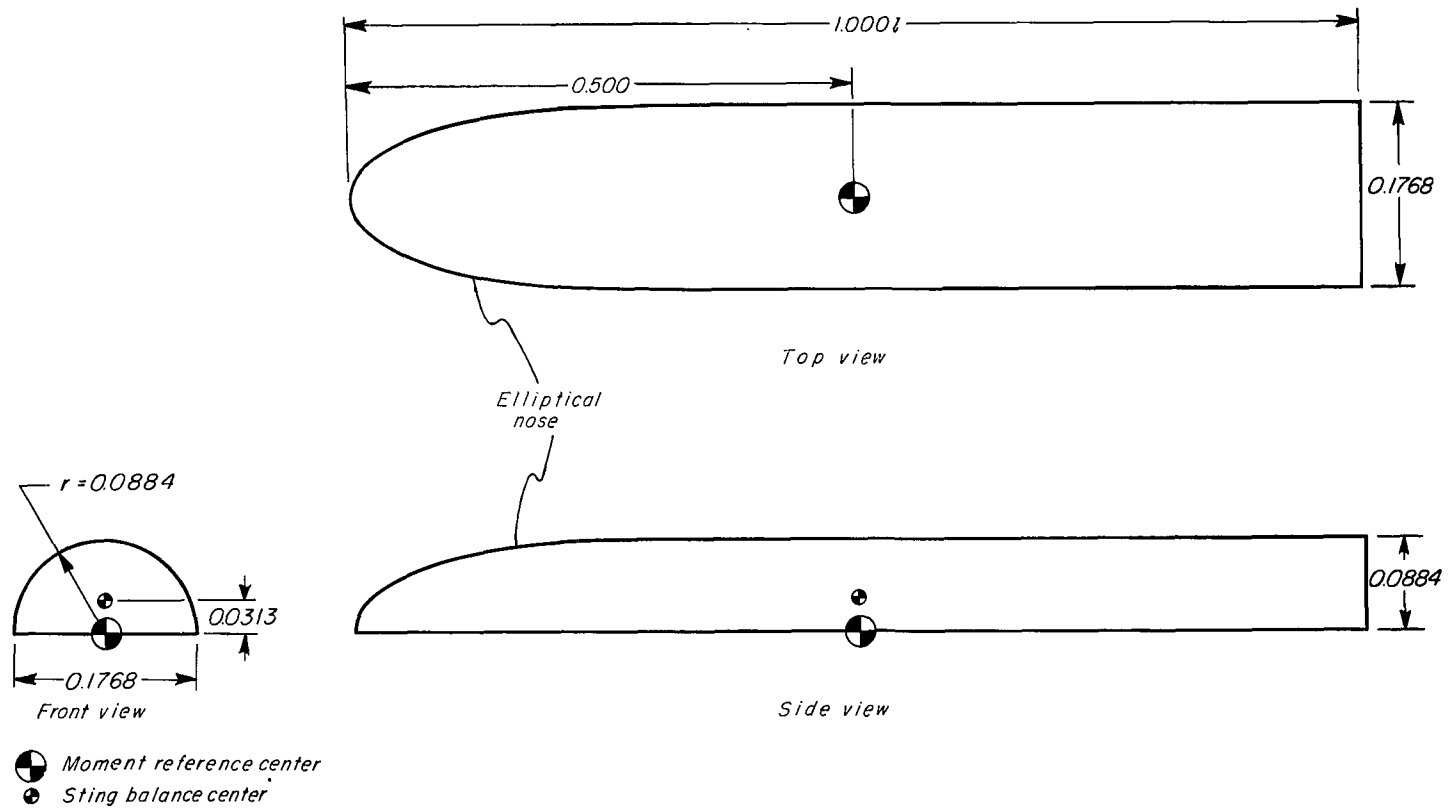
Drawing of half-circle cross-section configuration. All dimensions based on vehicle length, $l = 72$ inches (183 cm).
